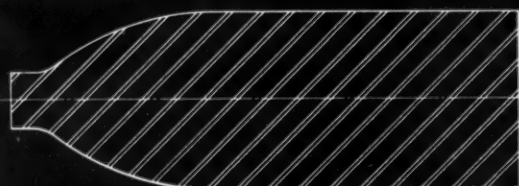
Dies and Punches Provided on the Forging Machines that Produce the Shot Bodies
